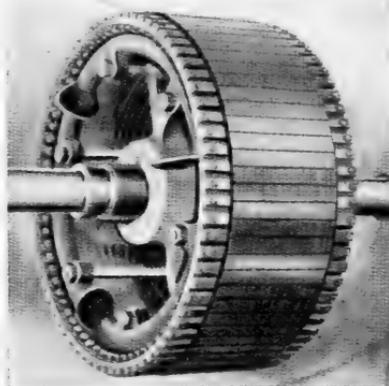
Squirrel Cage Rotor, showing Construction of Rotor Spider and Screwed End Rings.
